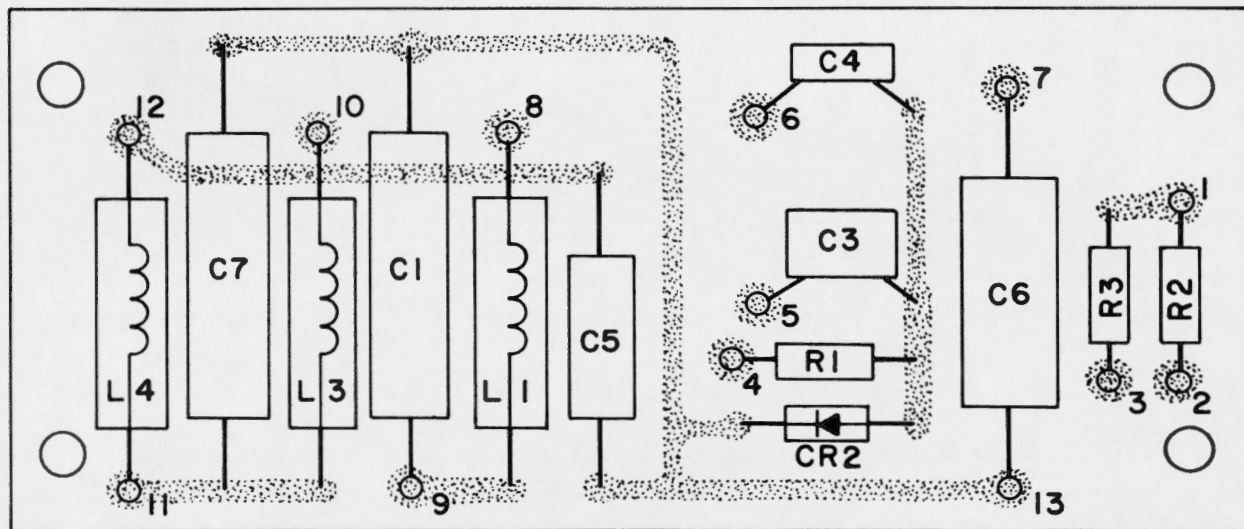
Printed Circuit Terminal Board A1A9TB-1, Parts Location
